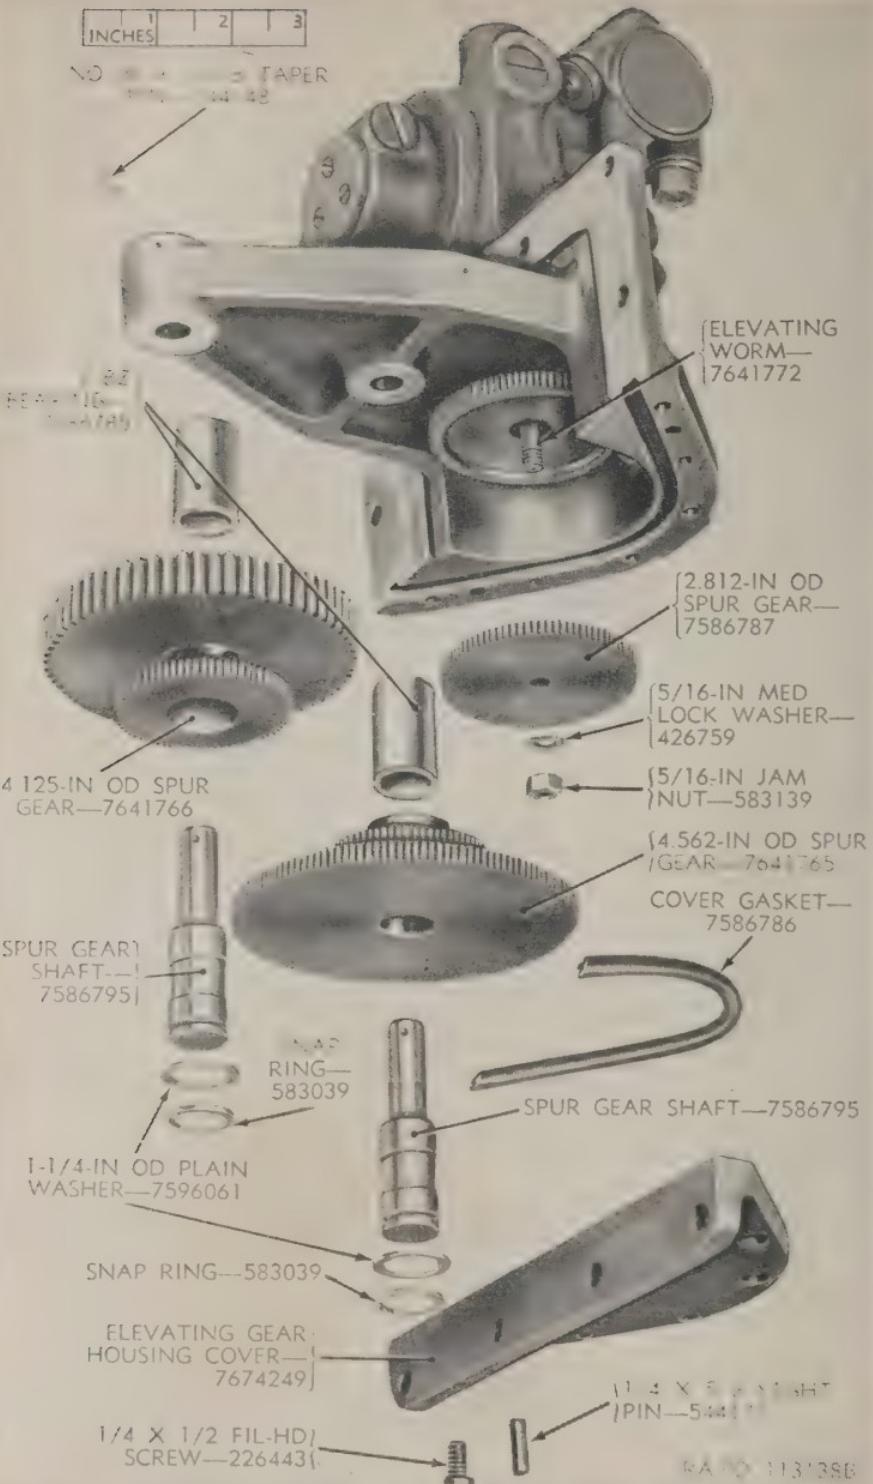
Telescope mount M32—removal of the elevating gear housing cover and spur gears from the housing—exploded view.
